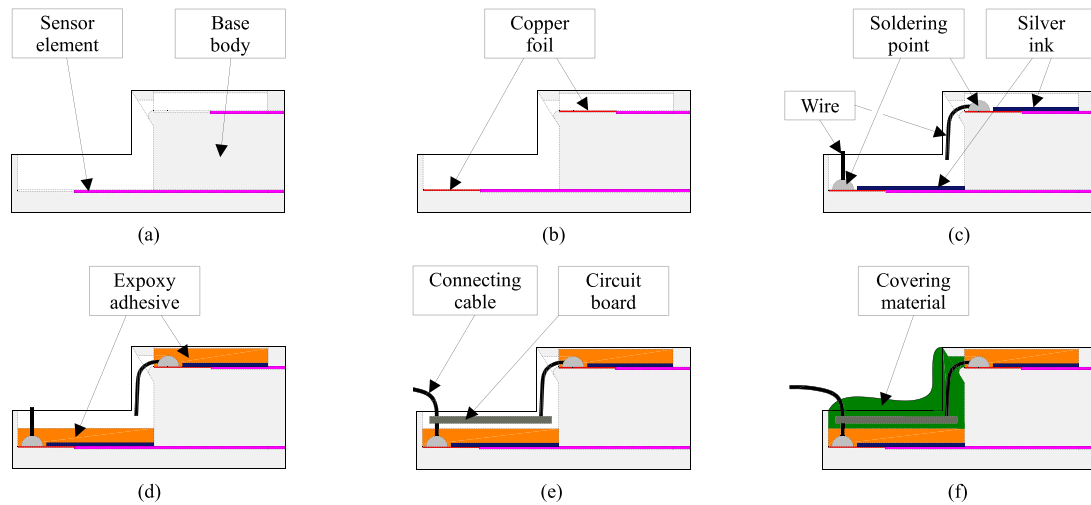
Schematic representation of the manual fabrication steps for establishing the electrical contact between the sensor elements and the embedded circuit board. (a) Base body with integrated sensor elements, (b) application of the copper foils, (c) soldering of wires to the copper foils and electrical connection of the copper foils with the sensor elements using silver ink, (d) protection of the soldering points and contact areas by applying an epoxy adhesive, (e) placement of the circuit board with the Wheatstone half-bridge followed by soldering to the wires from the copper foils, and (f) application of a covering material to protect the electronics from external influences.
